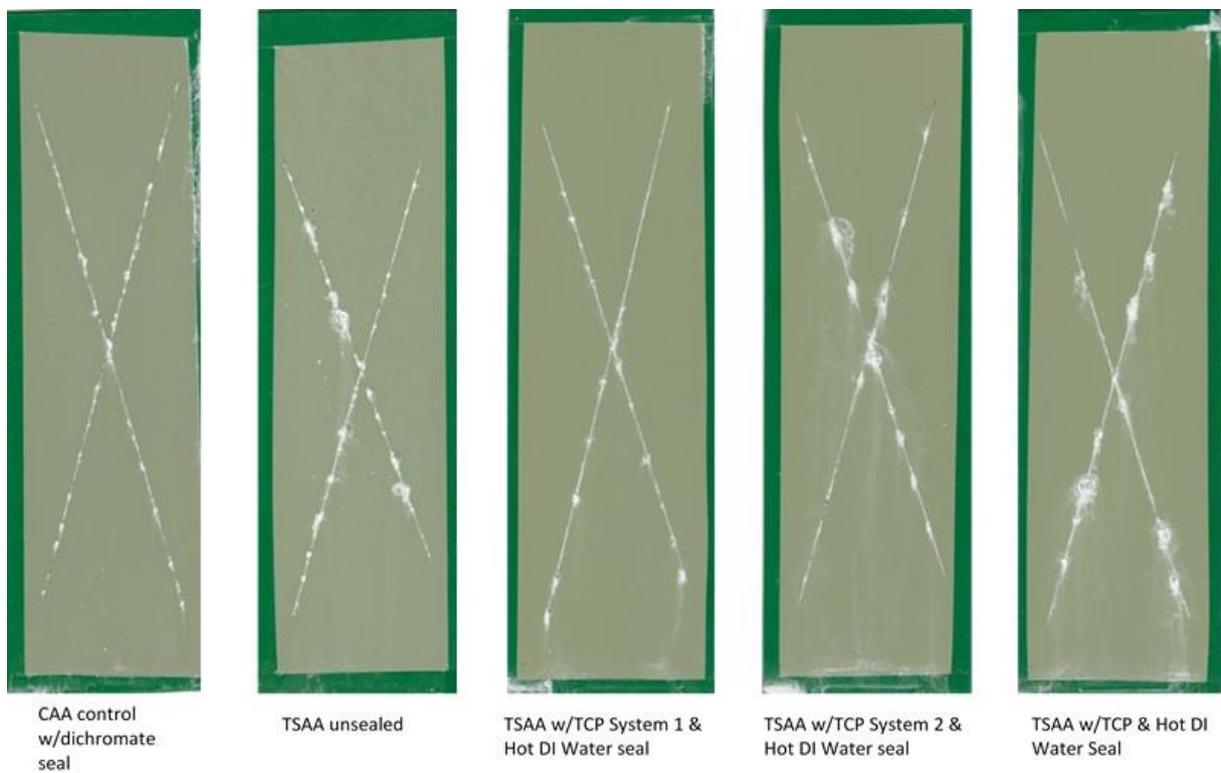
Scribed Corrosion Testing, AMS C 27725 Fuel Tank Coating
